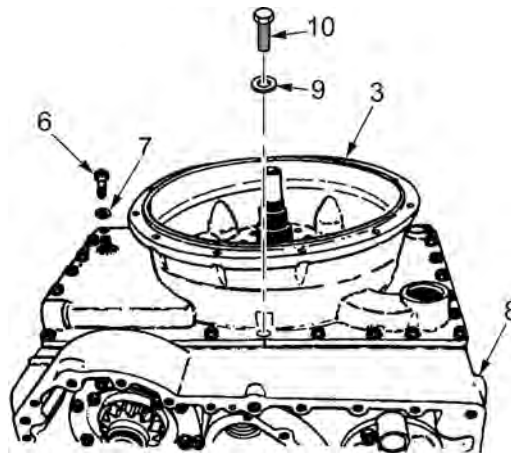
Input Housing Hardware Removal and Jack Bolt Installation.
